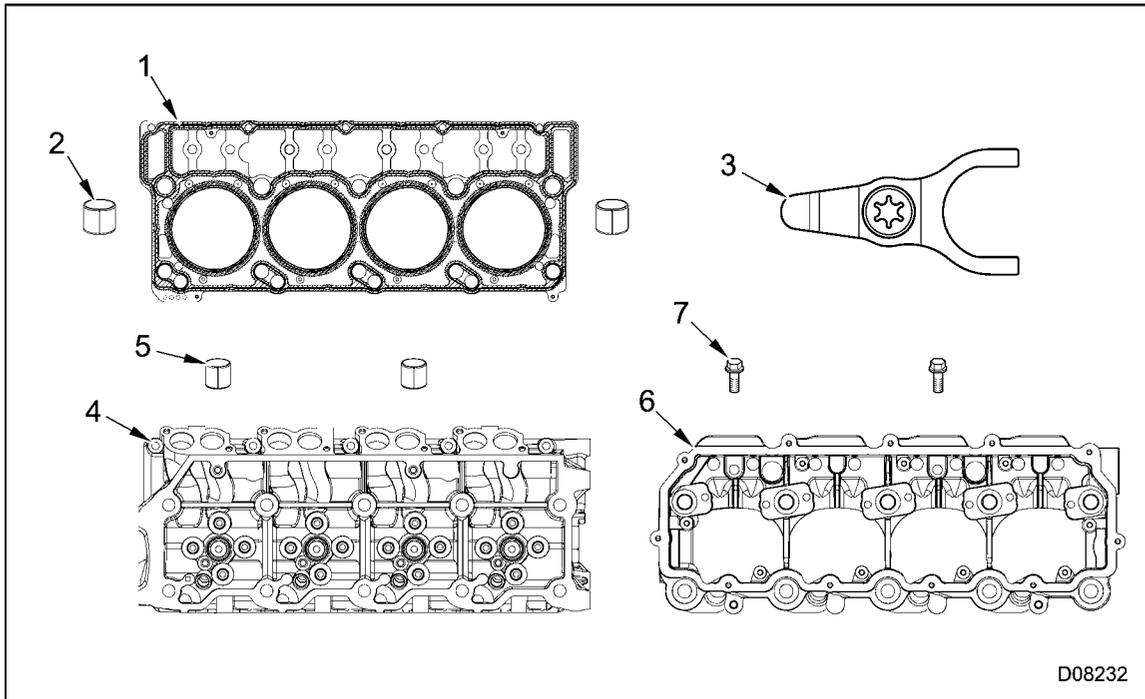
2006 Model Year (two M10 mounting bolts for rocker arm carrier)
